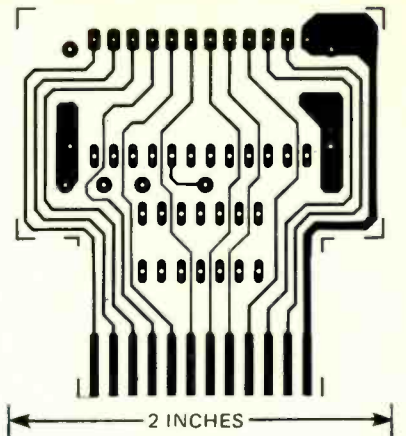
THE COMPONENT SIDE of the double-sided PC board is shown here.
